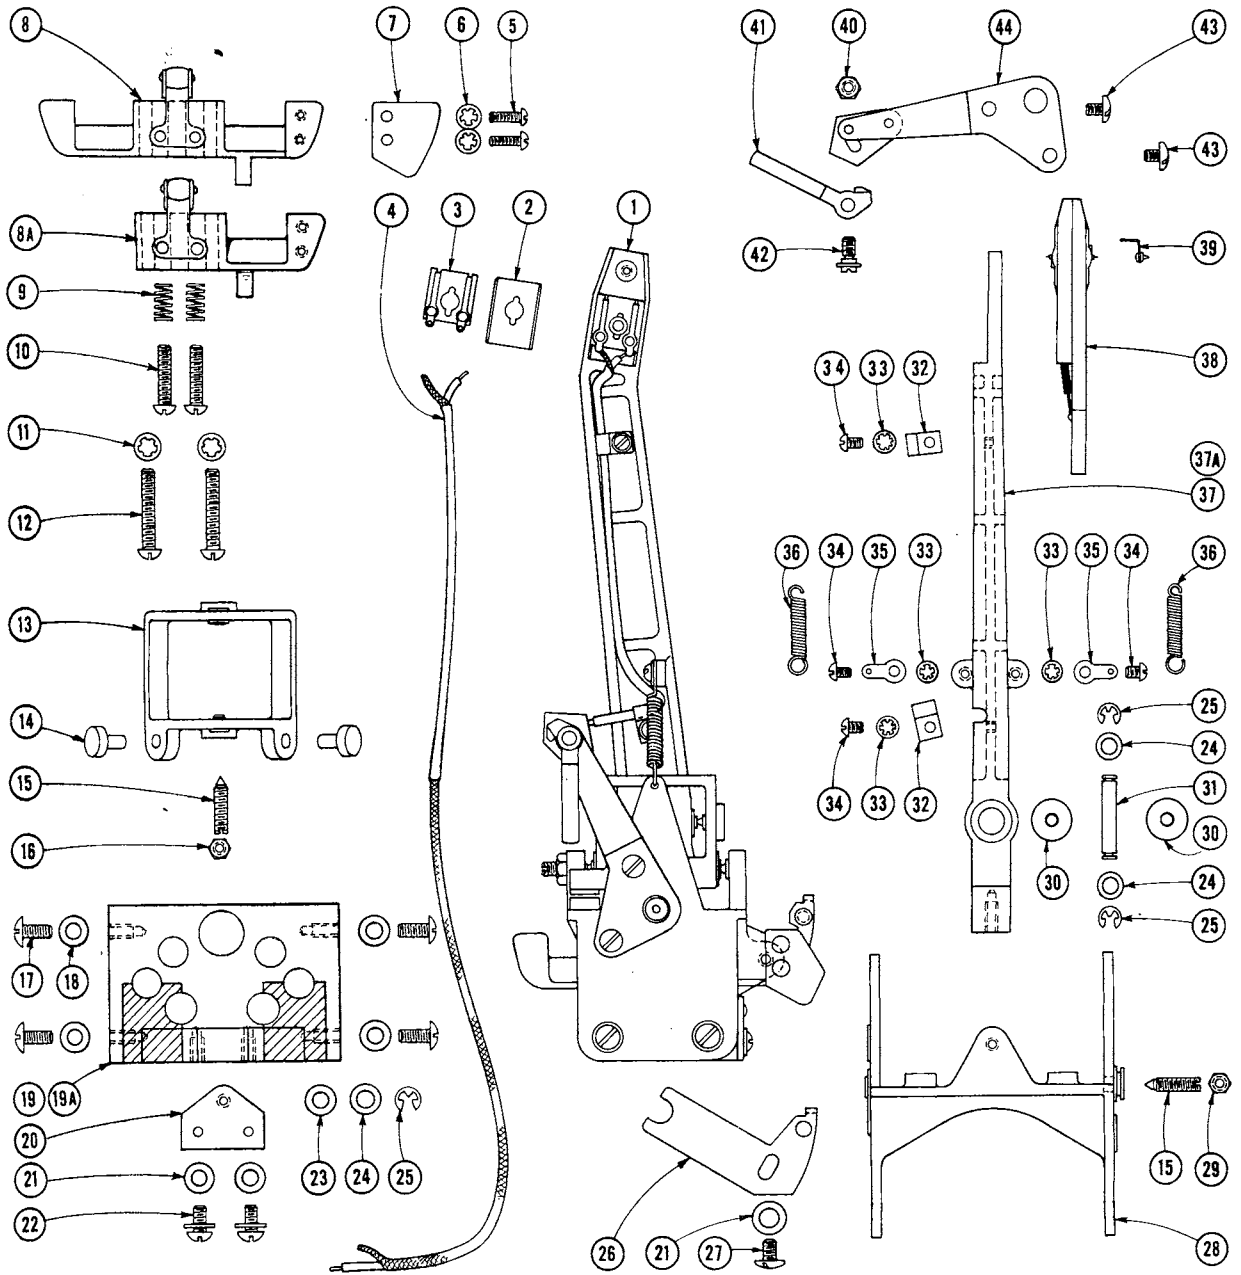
CRADLE & PICKUP ARM ASSEMBLY
